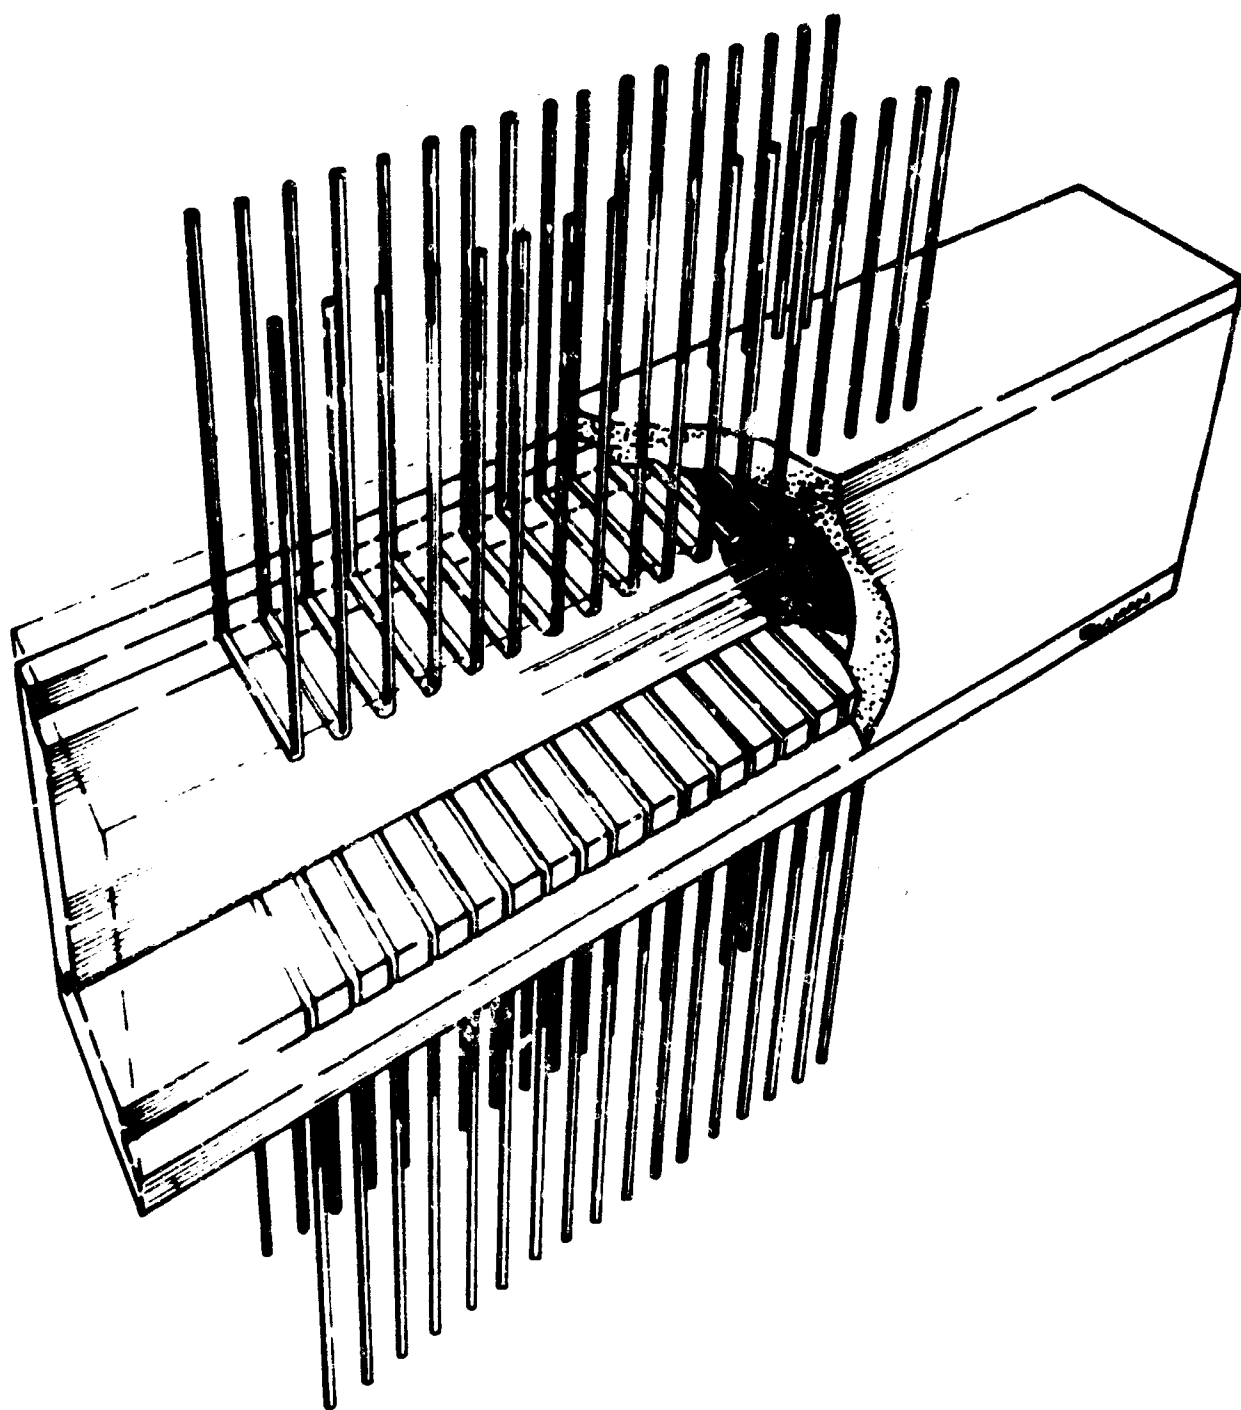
FIVE - ELECTRODE GENERATOR DUCT ASSEMBLY
